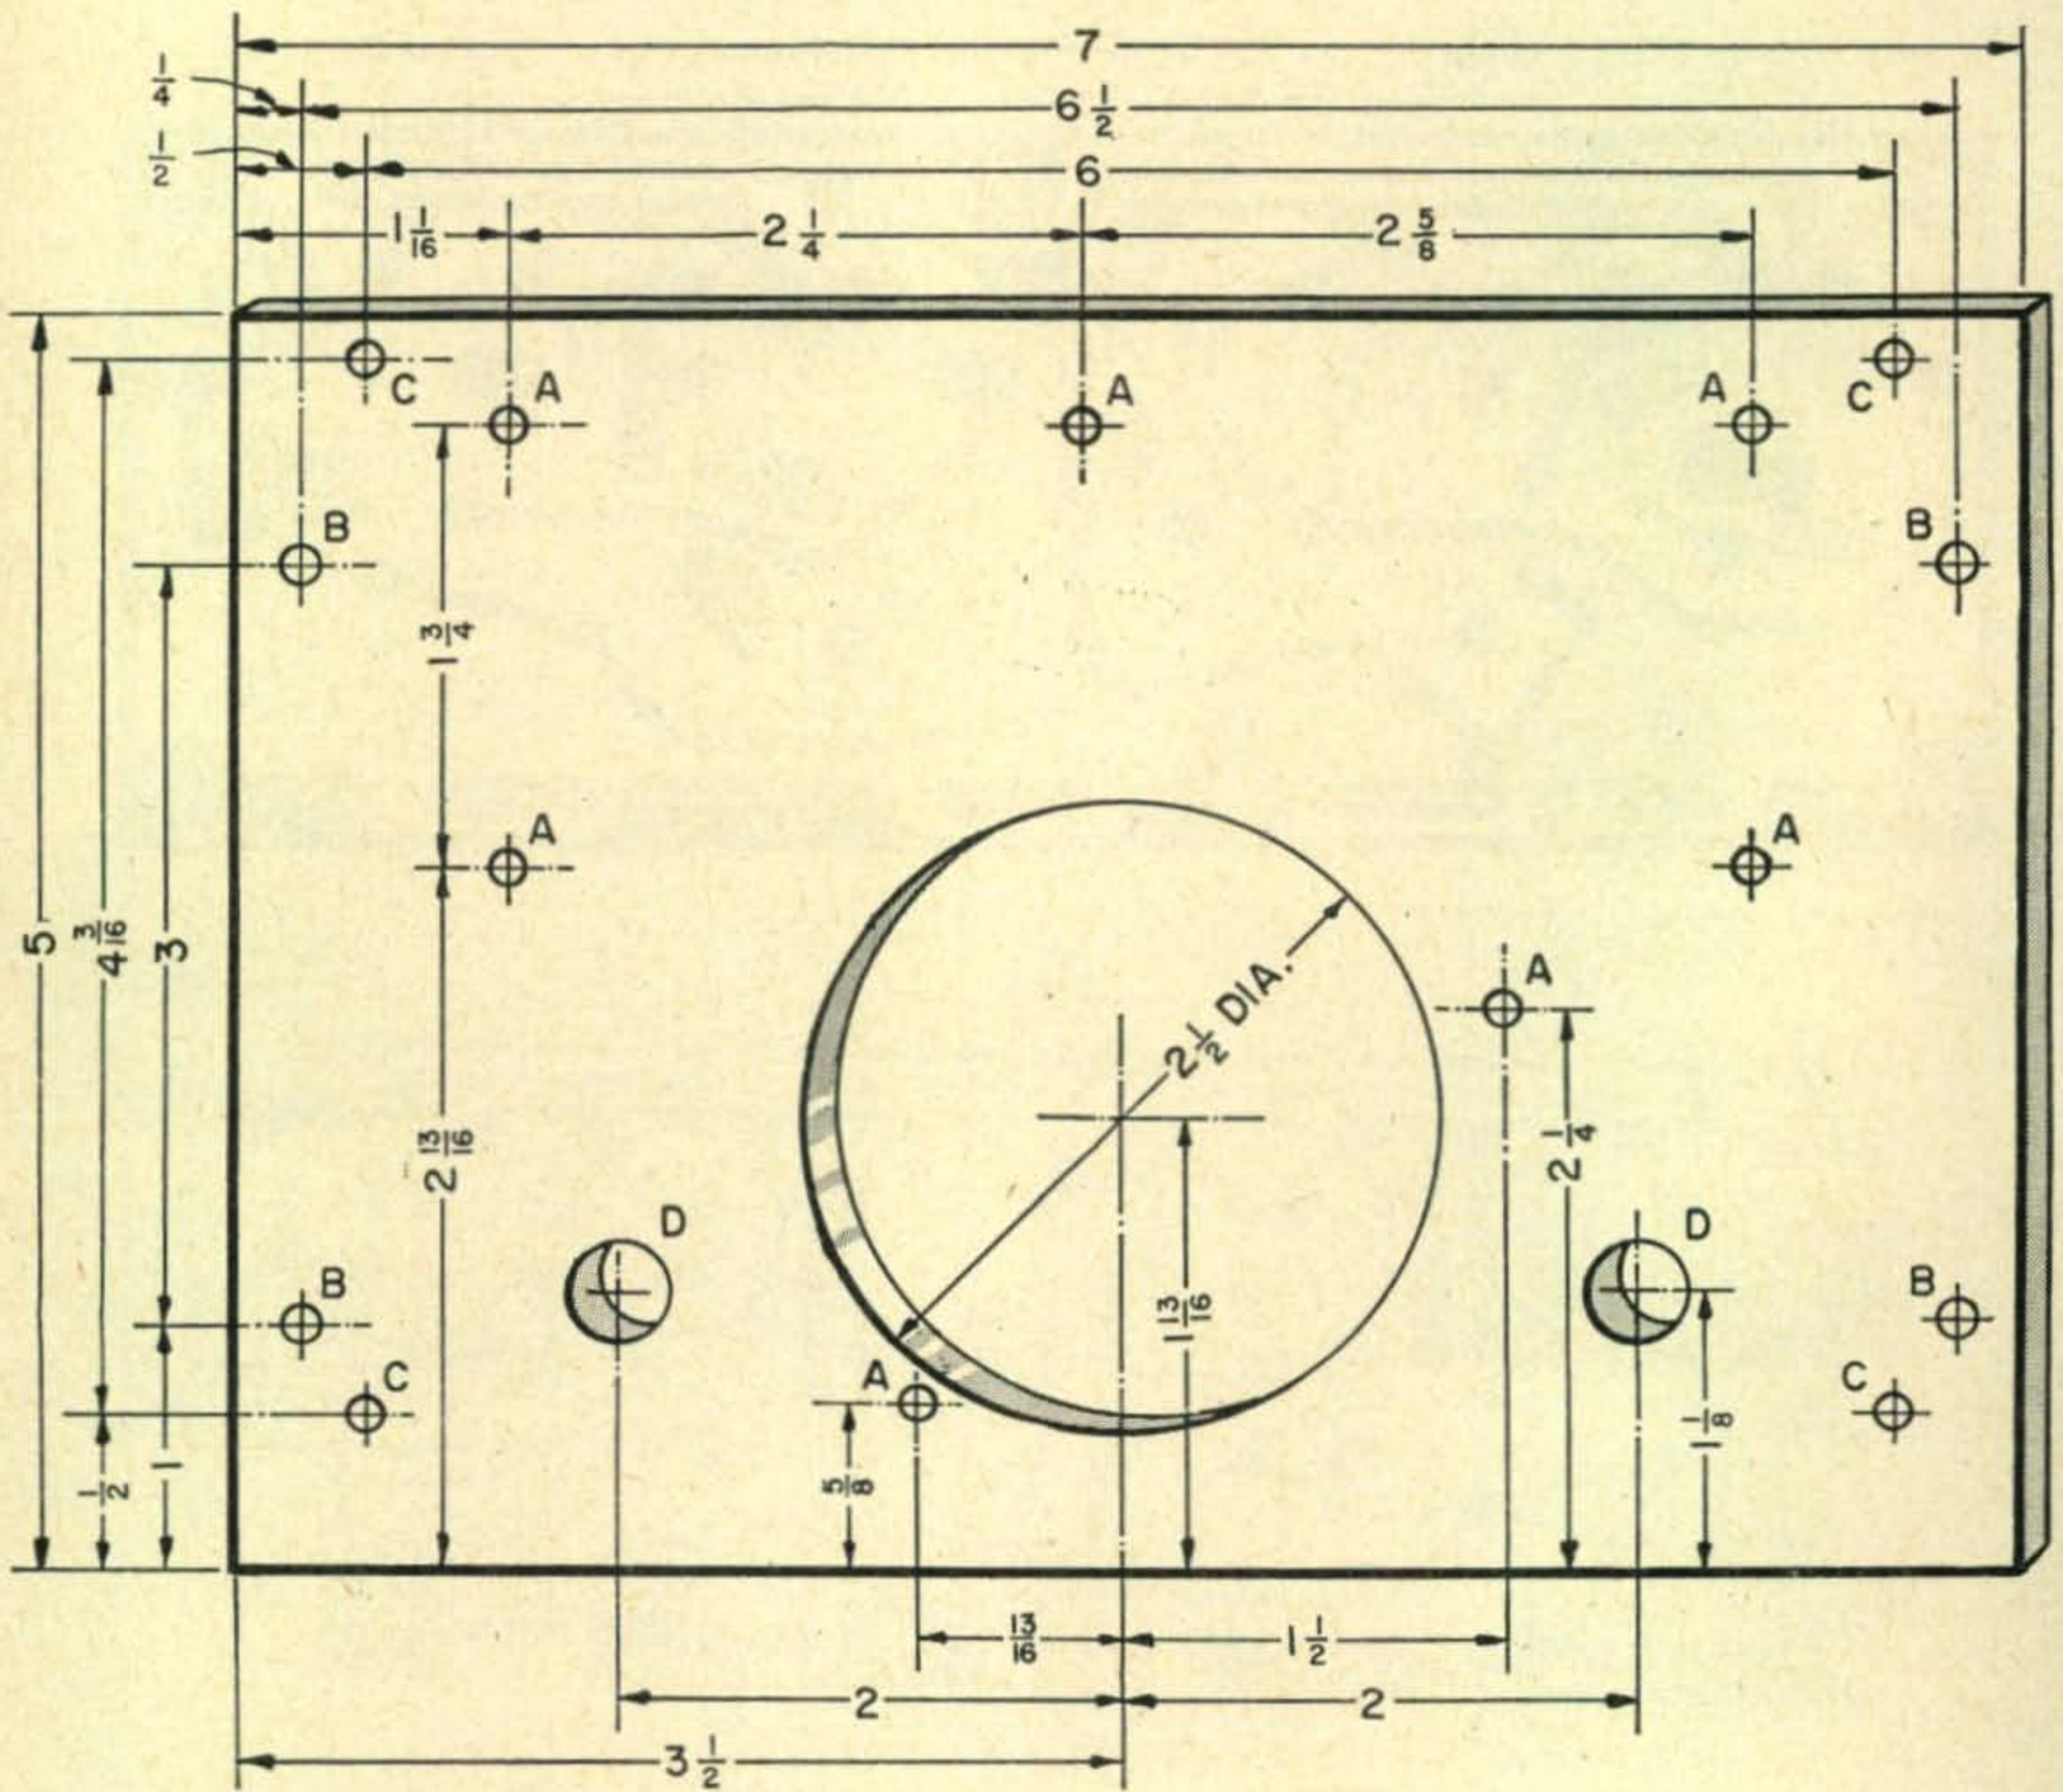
Panel layout showing location of holes. Large cut-out at center provides clearance for the planetary drive mechanism of the SCN dial. Other hole sizes are as follows: A—#6-32 tap, B—#28 drill to clear #6-32 screws, C—#33 drill to clear #4-40 screws, and D—3/8 inch diameter.
